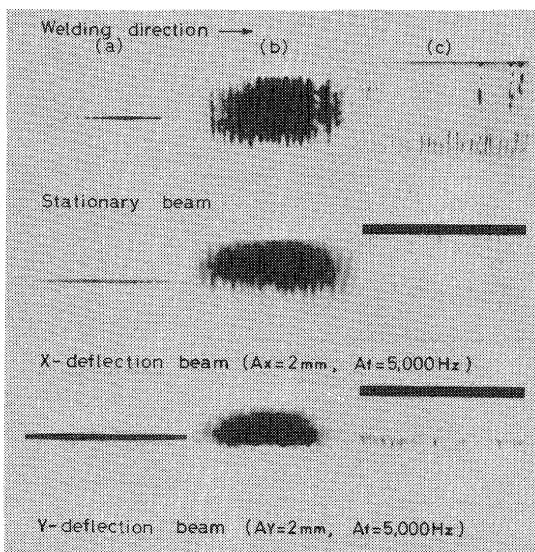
X-ray film photographed from side of weld bead by pin-hole camera and radiography (1200).
